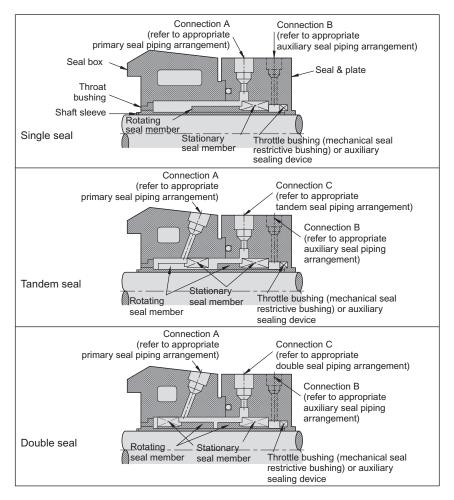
Schematic diagram showing the general mechanical seal arrangements. Courtesy Durametallic Corporation.
